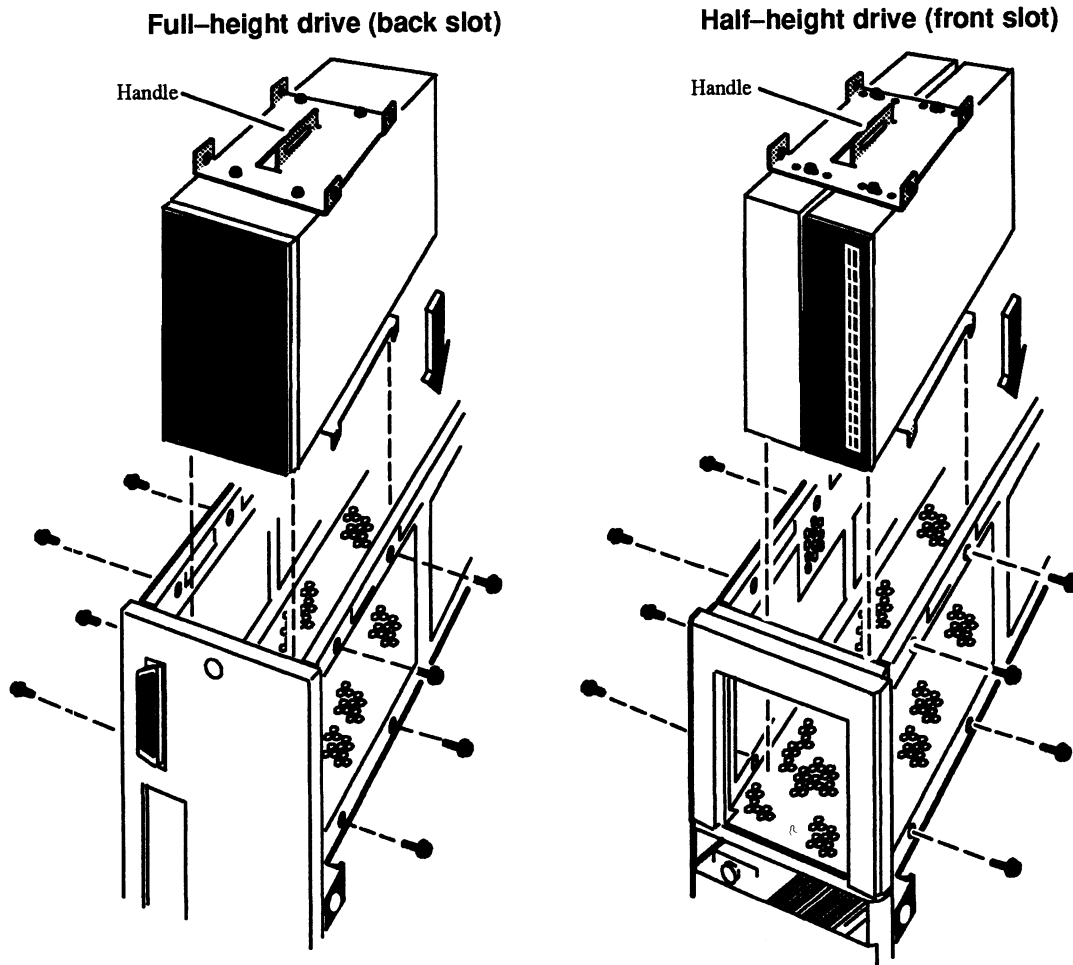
Installing a Drive Assembly in the Computer Unit
